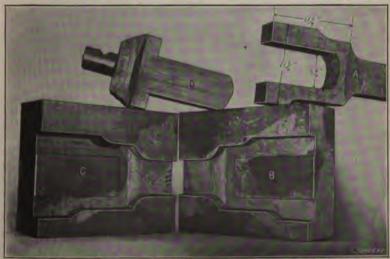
Dies and Tools used in making Locomotive Main Rods in the 6-inch Ajax Universal Forging Machine
